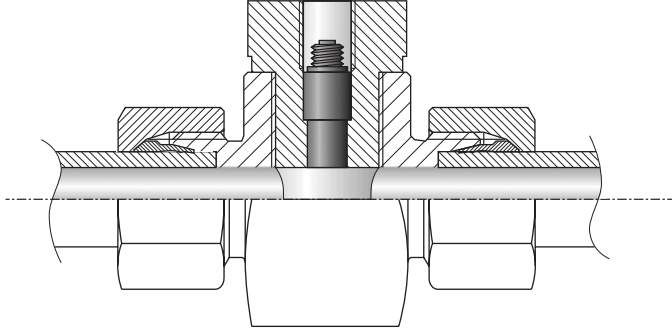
Kistler type 6005 sensor mounted in a steel pipe.
